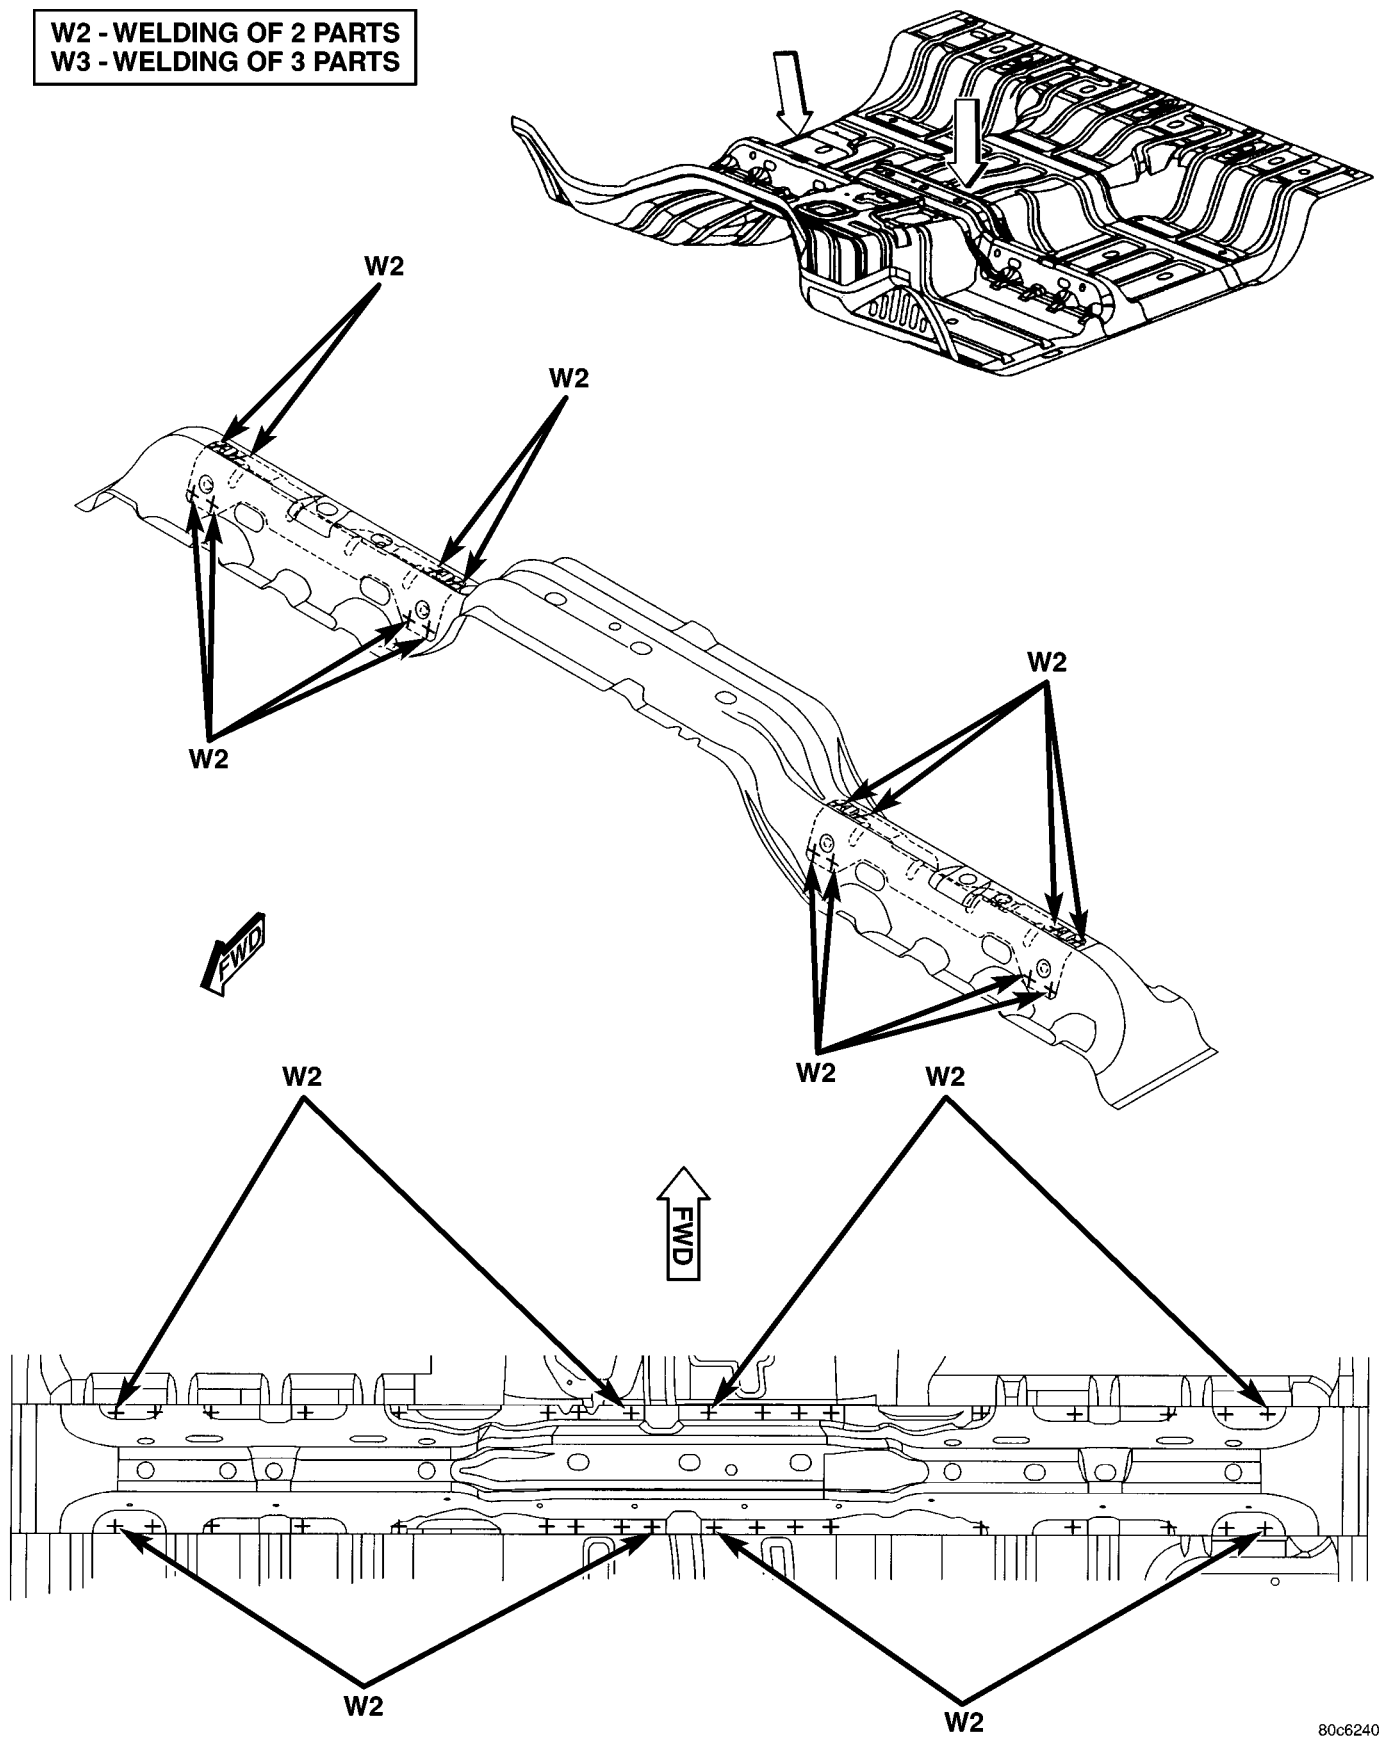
SEAT MOUNTING FRONT BRACKETS - STANDARD CAB
